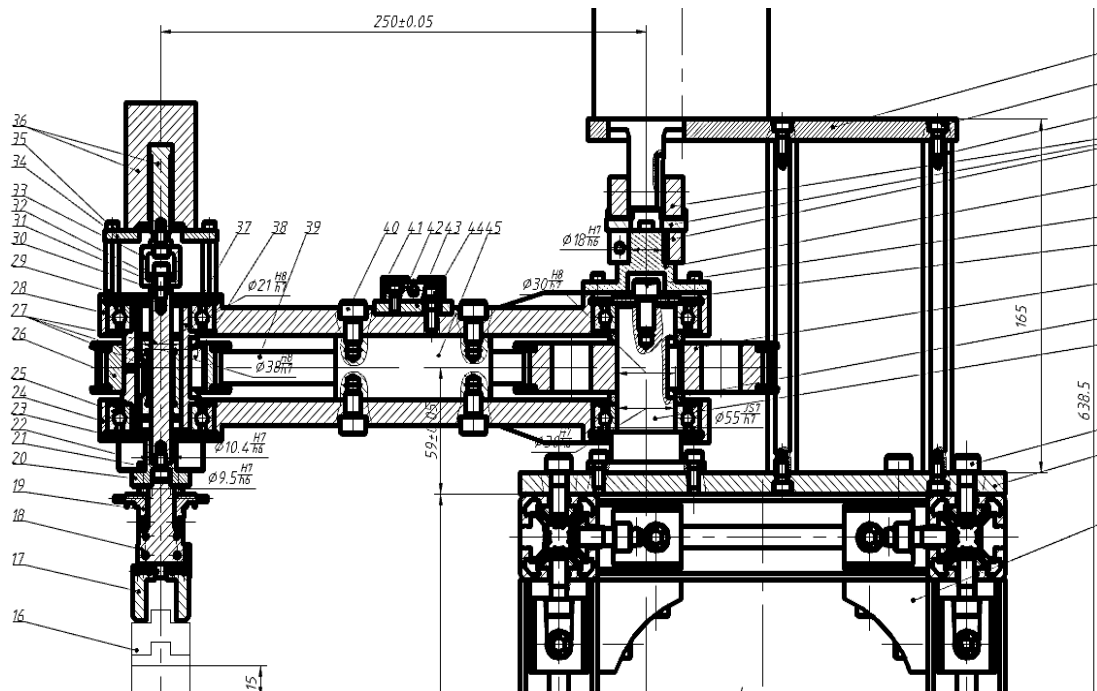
engineering assembly drawing of production line switching steering transmission device design
